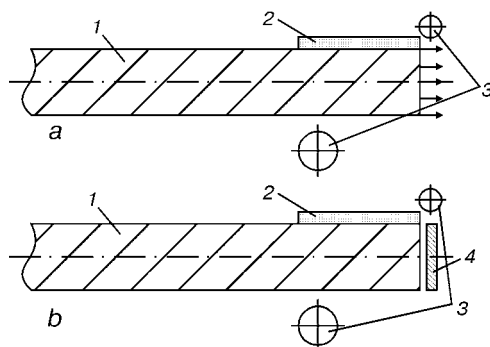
Disc with inductor without a shield (a) and with a shield (b): 1 — part; 2 — charge; 3 — ring-type inductor with two turns; 4 — shield
